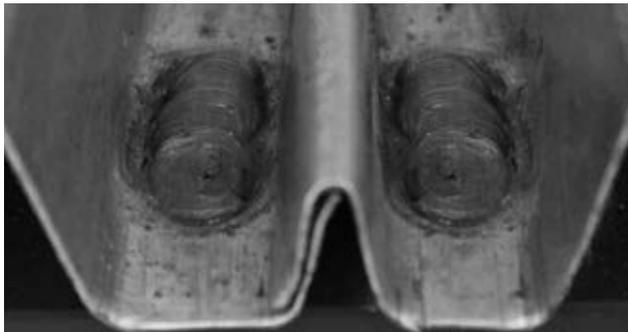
ARC SEAM WELD (weld to support)
